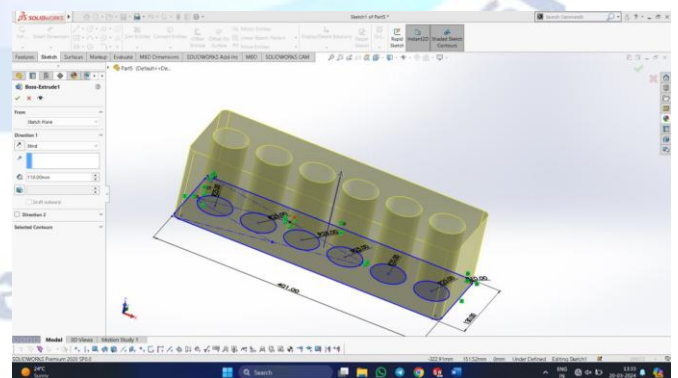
3D VIEW OF 6CYLINDER IC ENGINE
